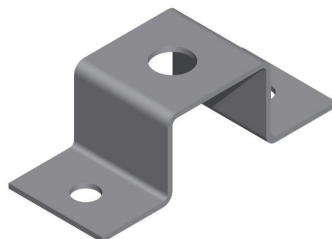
CONCRETE INSERT FRAME FOR ANCHOR BOLT
